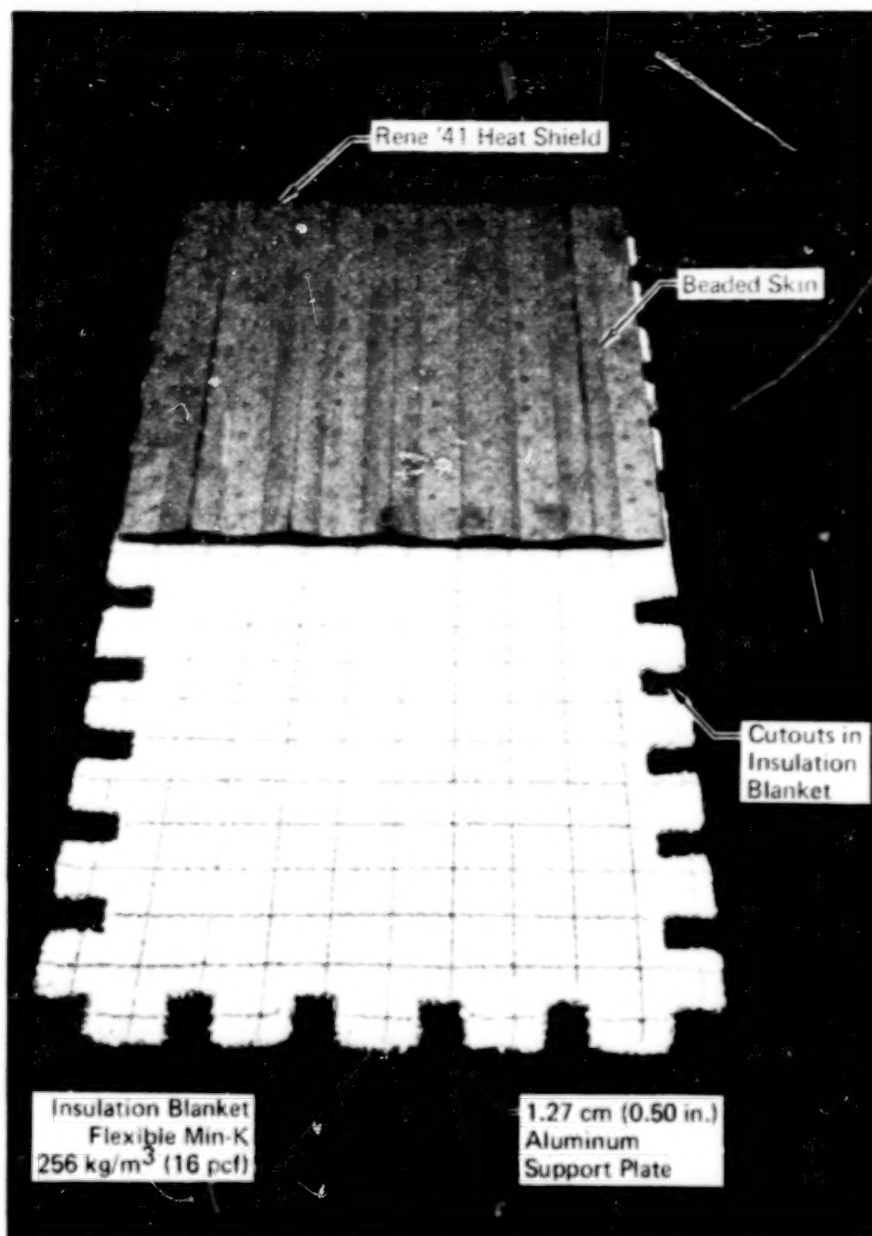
PARTIALLY ASSEMBLED TEST SPECIMEN
